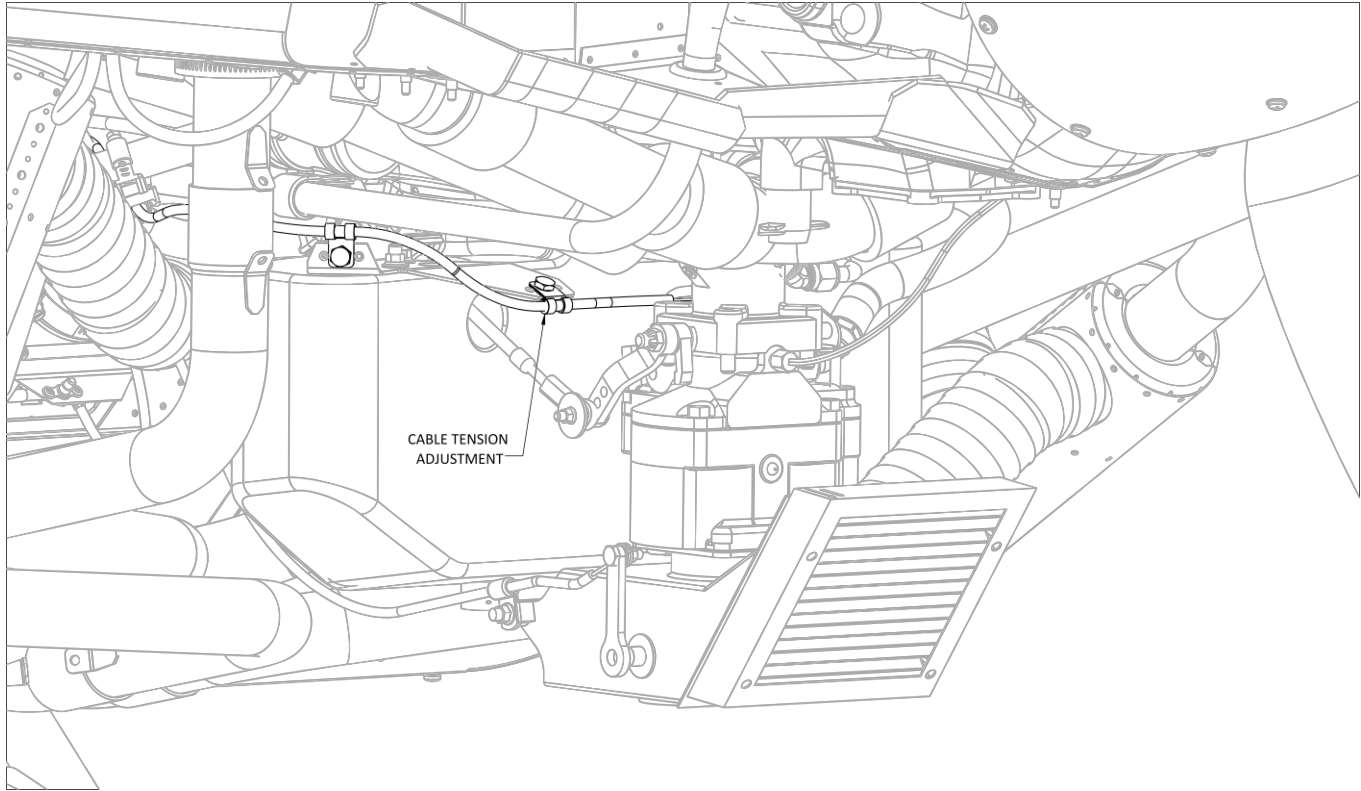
Mixture cable attachment. Can be used to adjust cable tension.
